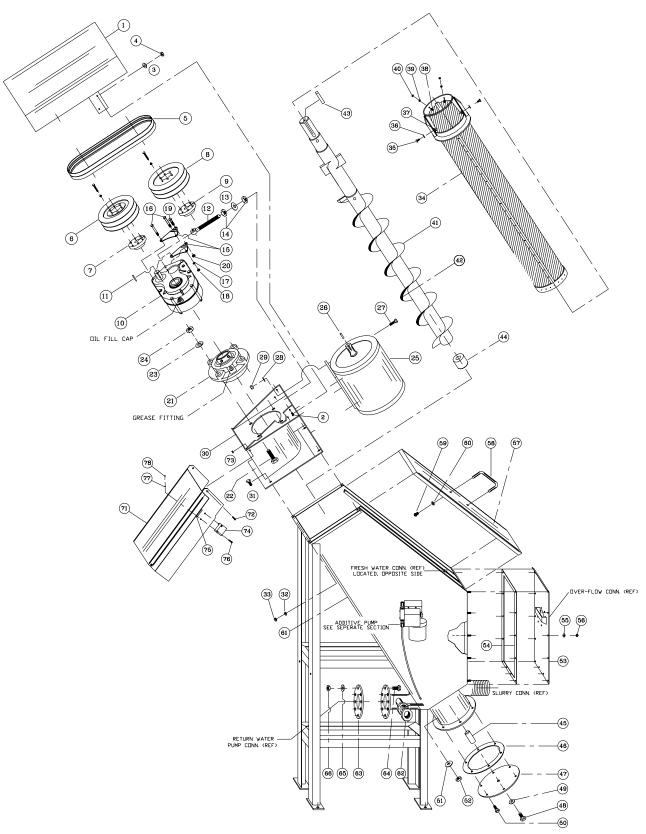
HYDRA-EXTRACTOR® MODEL HE-9S, EXPLODED VIEW
